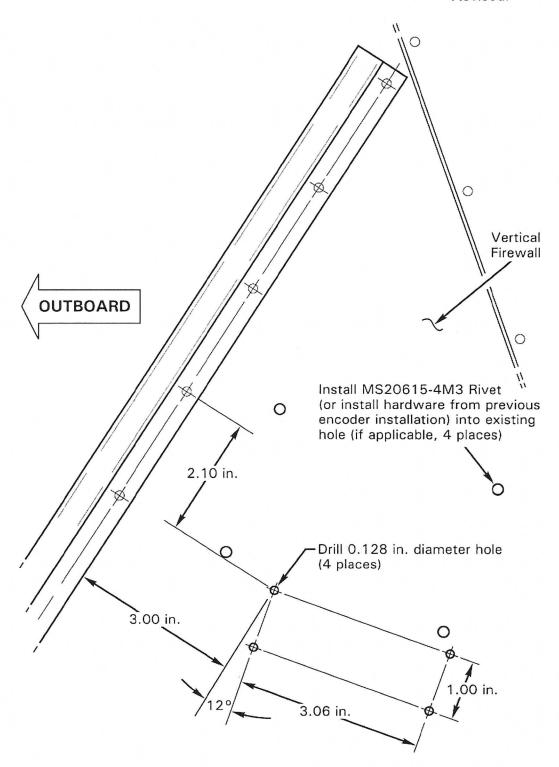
R22 VERTICAL FIREWALL DRILLING INSTRUCTIONS
